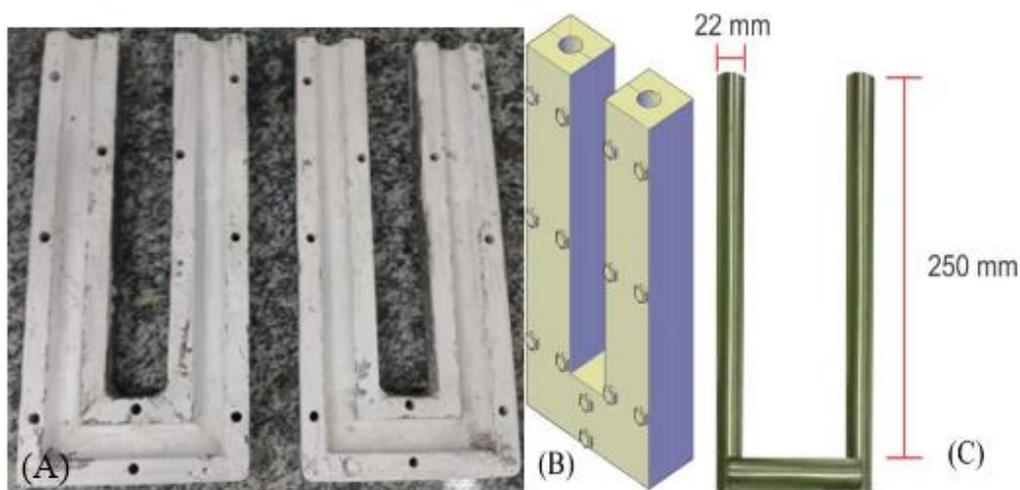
Mold type "U" (a), (b) the scheme of the mold closed and (c) the dimensions of the cast material produced. Available from: GPESMat file.
